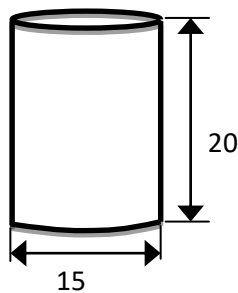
Hardness Test Specimen (All dimensions in mm)
